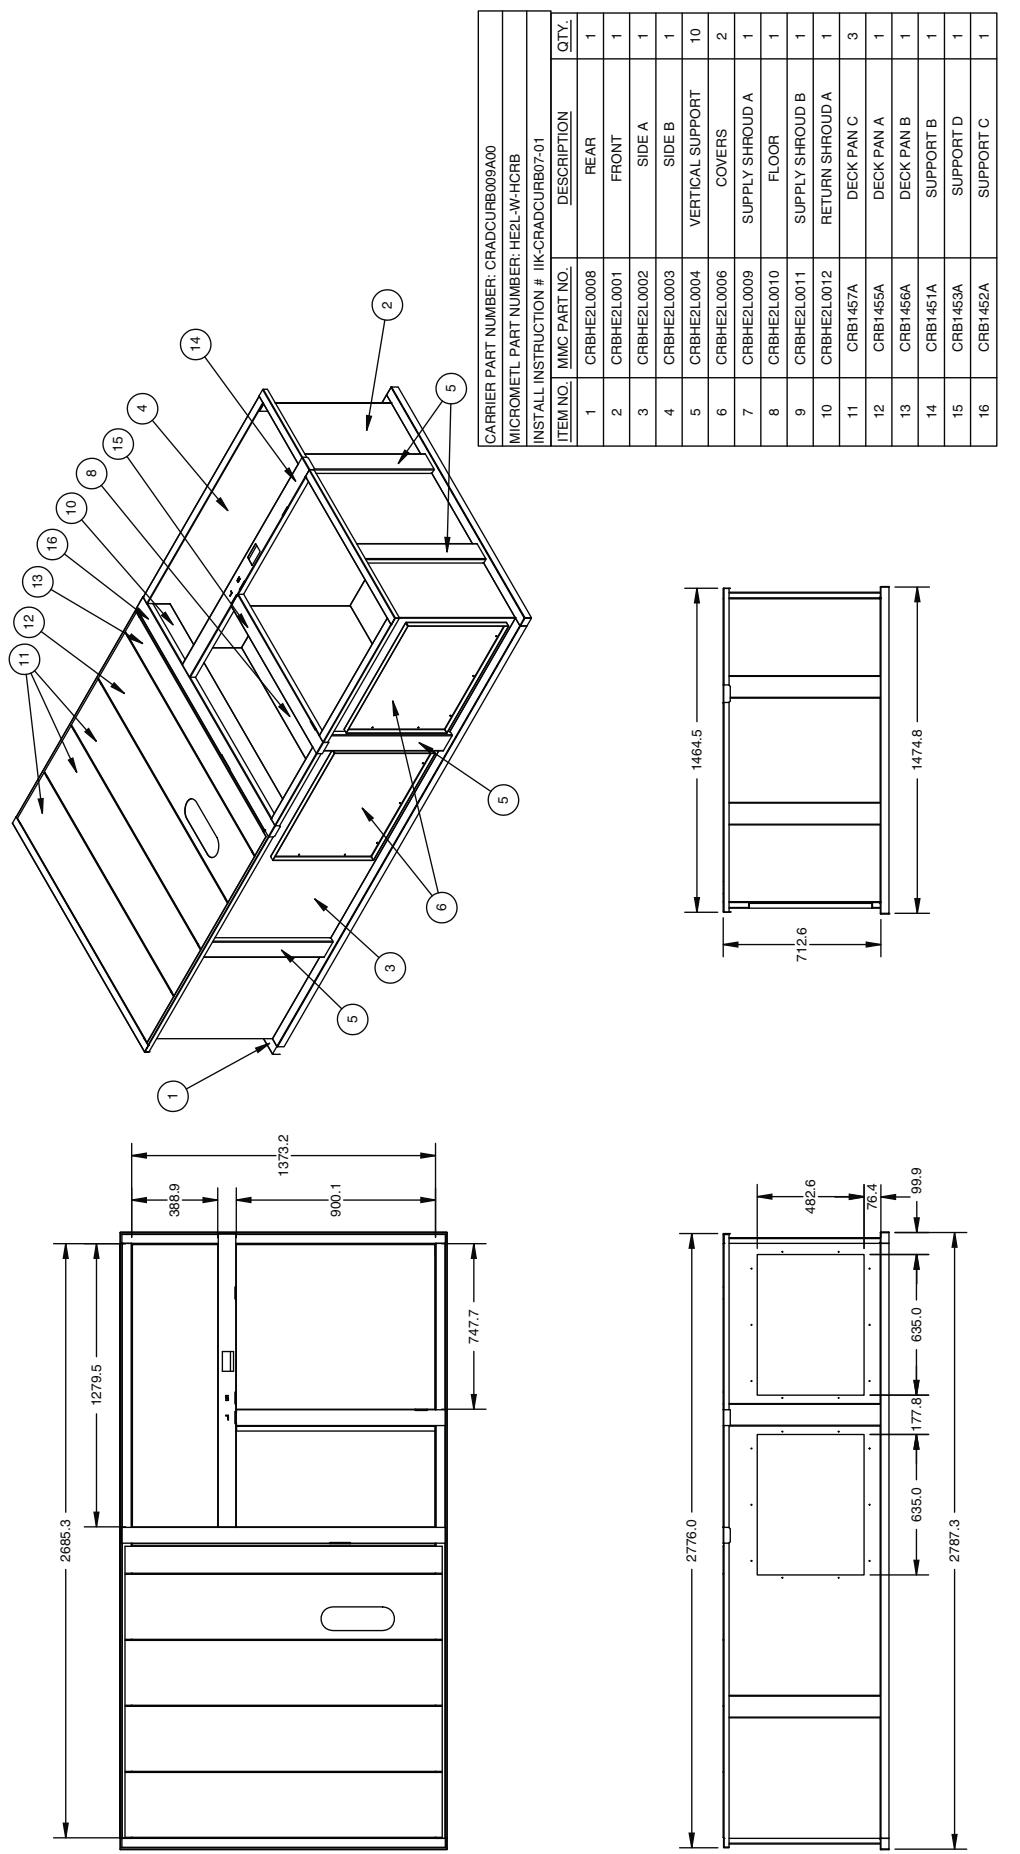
CRADCURB009A00 Horizontal Curb Adapter Assembly
